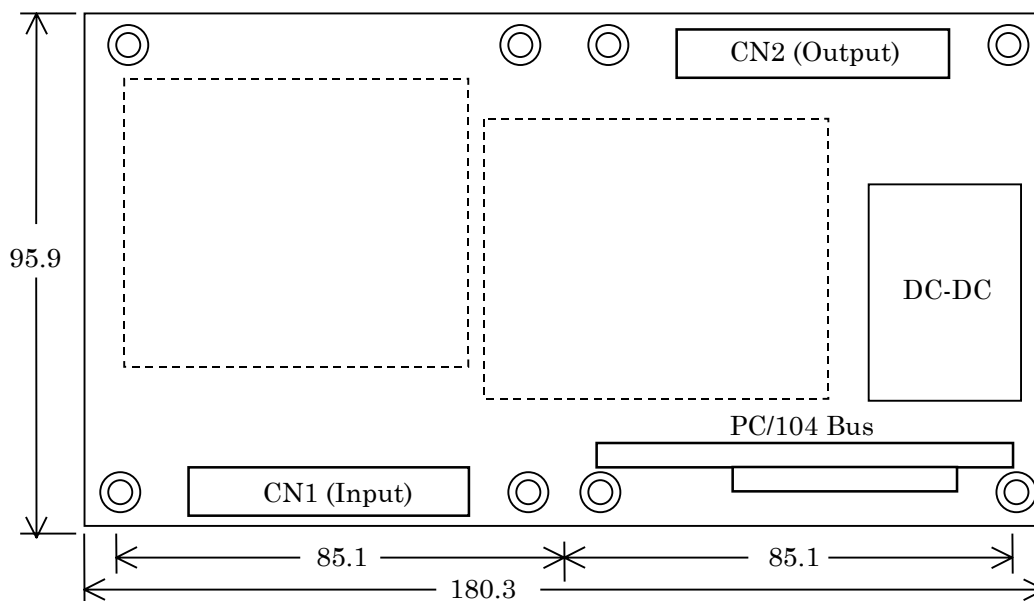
B. SHU-008PC104W board layout and the Dimensions
